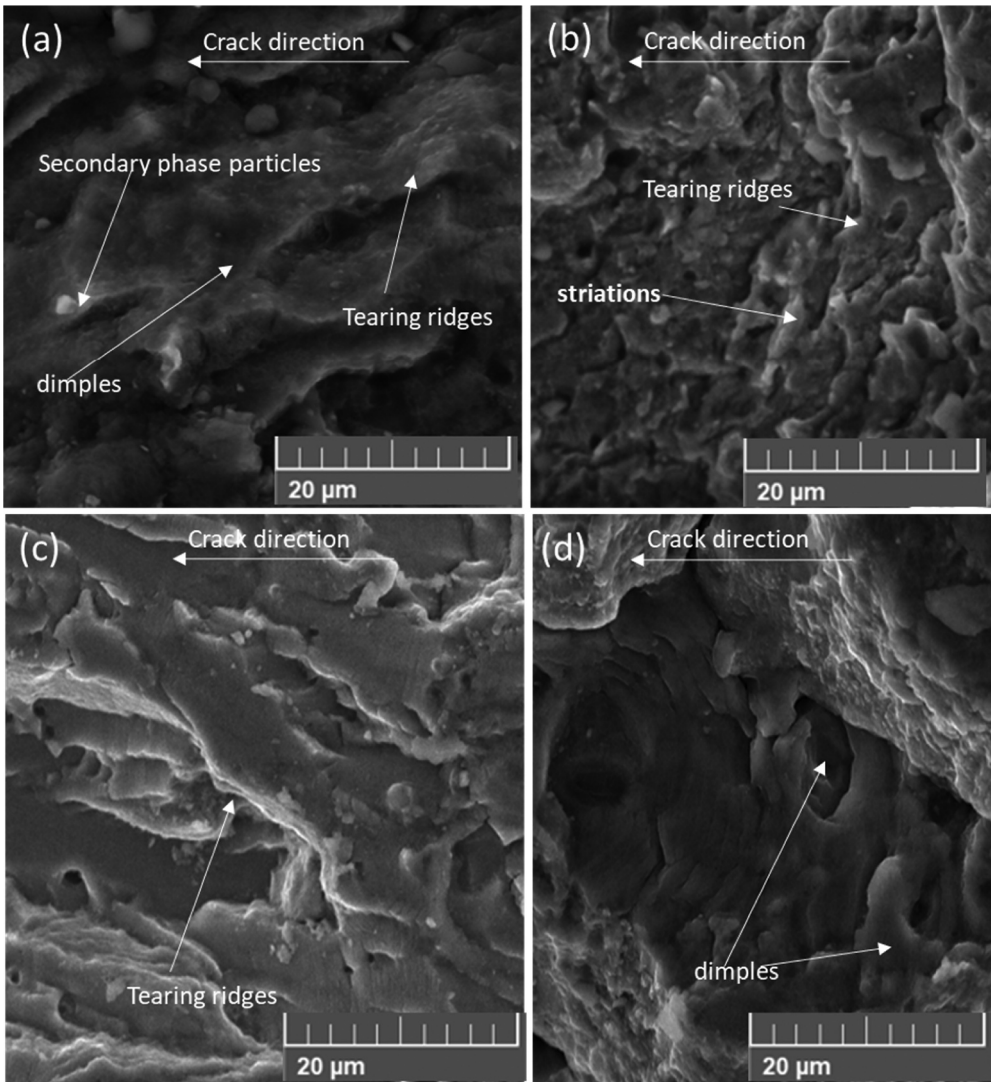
Fatigue crack propagation morphology of Al alloy 7075-T7, (a) CPS – countersunk rivet hole, (b) CPF – countersunk rivet hole, (c) CPS – perpendicular rivet hole, (d) CPF – perpendicular rivet hole.
